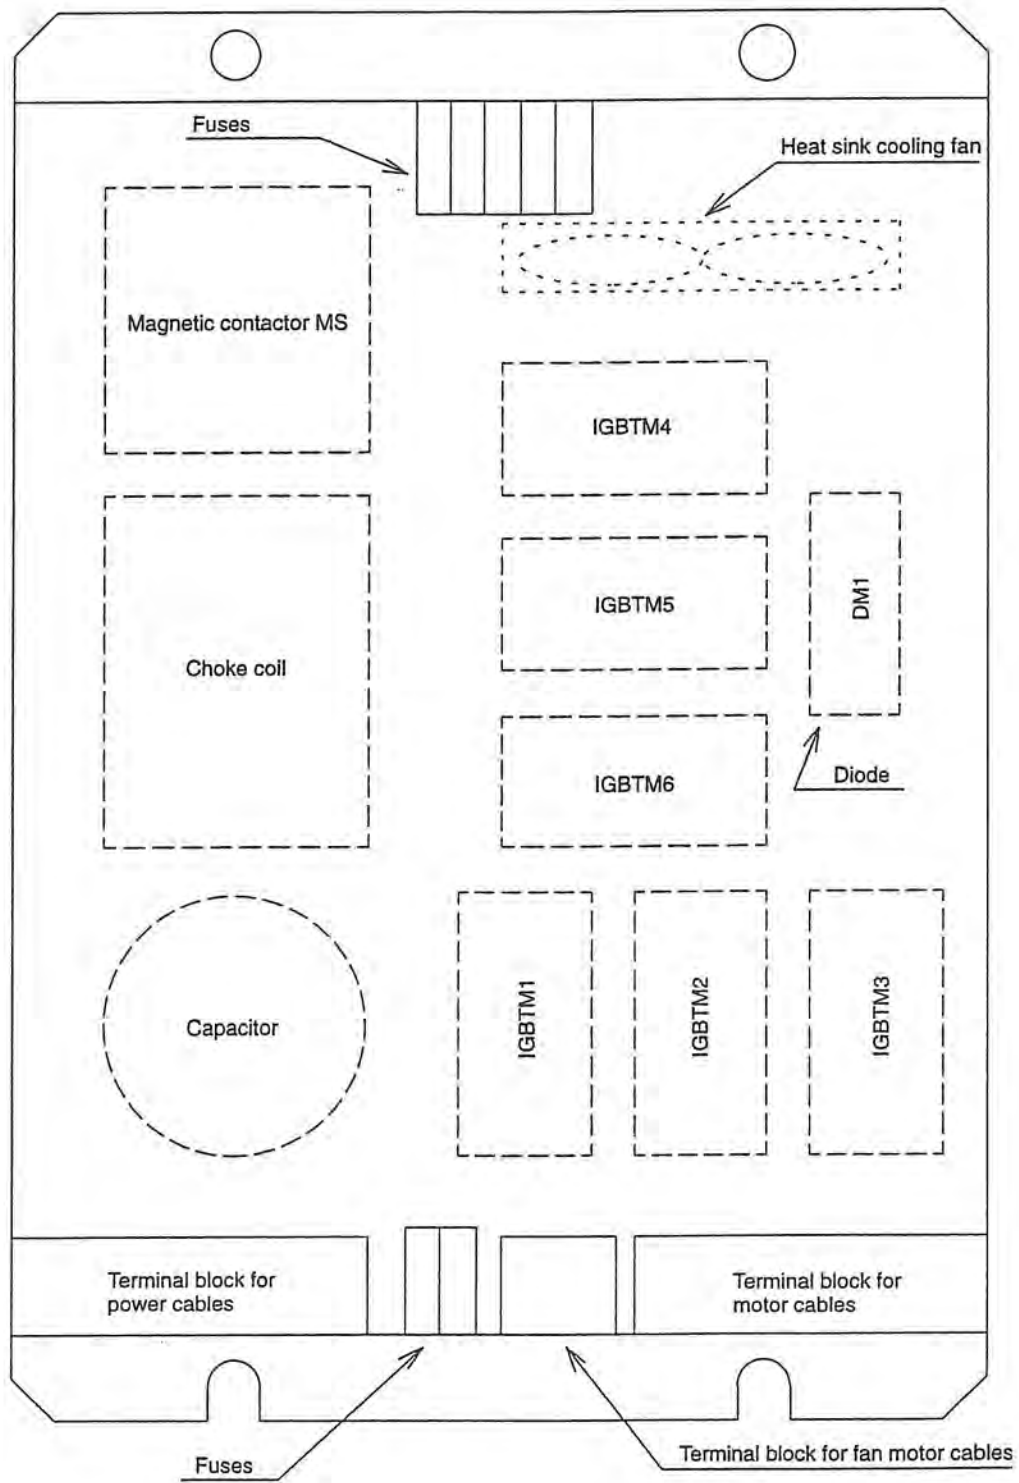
Arrangement of Major Component Parts on Power Unit for D11
